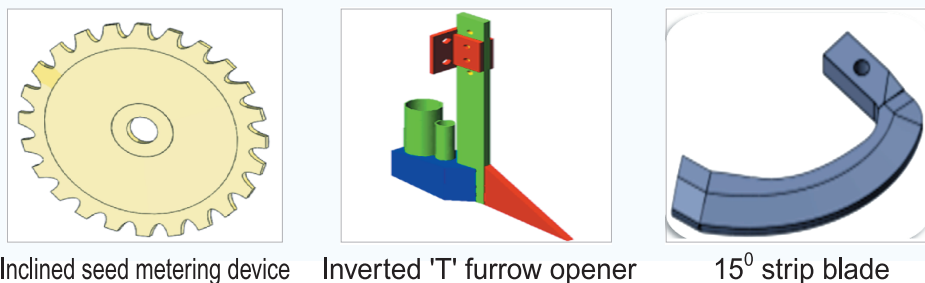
Seed meter, furrow opener and strip blade of BARI seed planter machine
